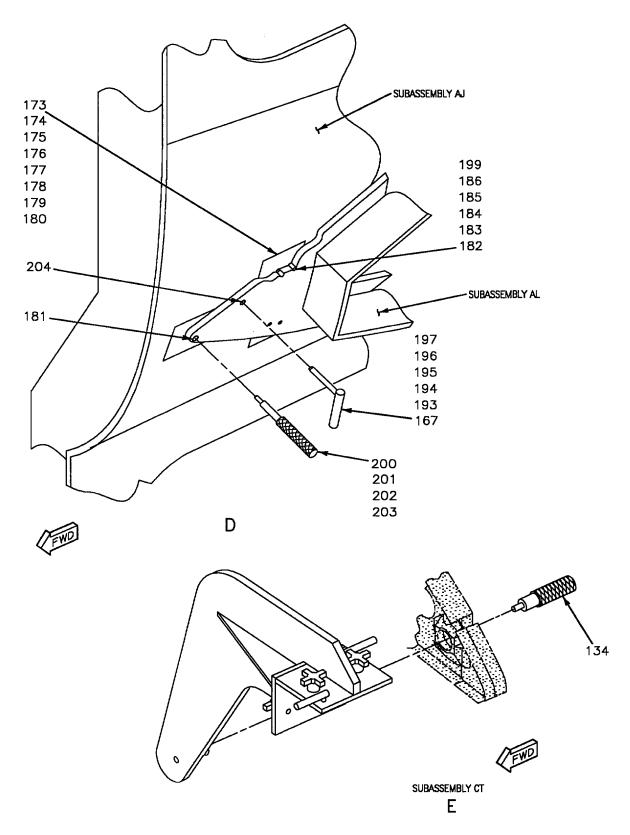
Repair to Inlet for Reinstallation on Same Aircraft (Sheet 6)
